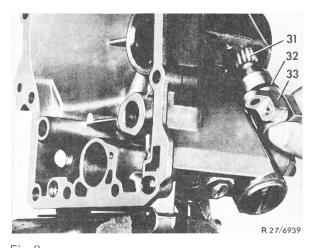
31 Tachometer pinion 33 Bearing body 32 O-ring
